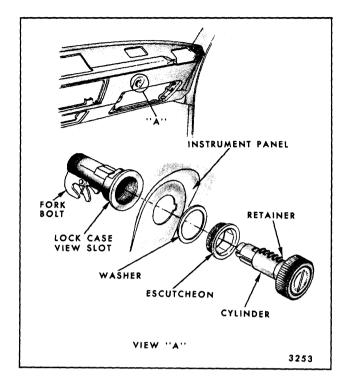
Instrument Panel Compartment Door Lock and Cylinder - Buick "A & E" Styles, Chevrolet Typical
